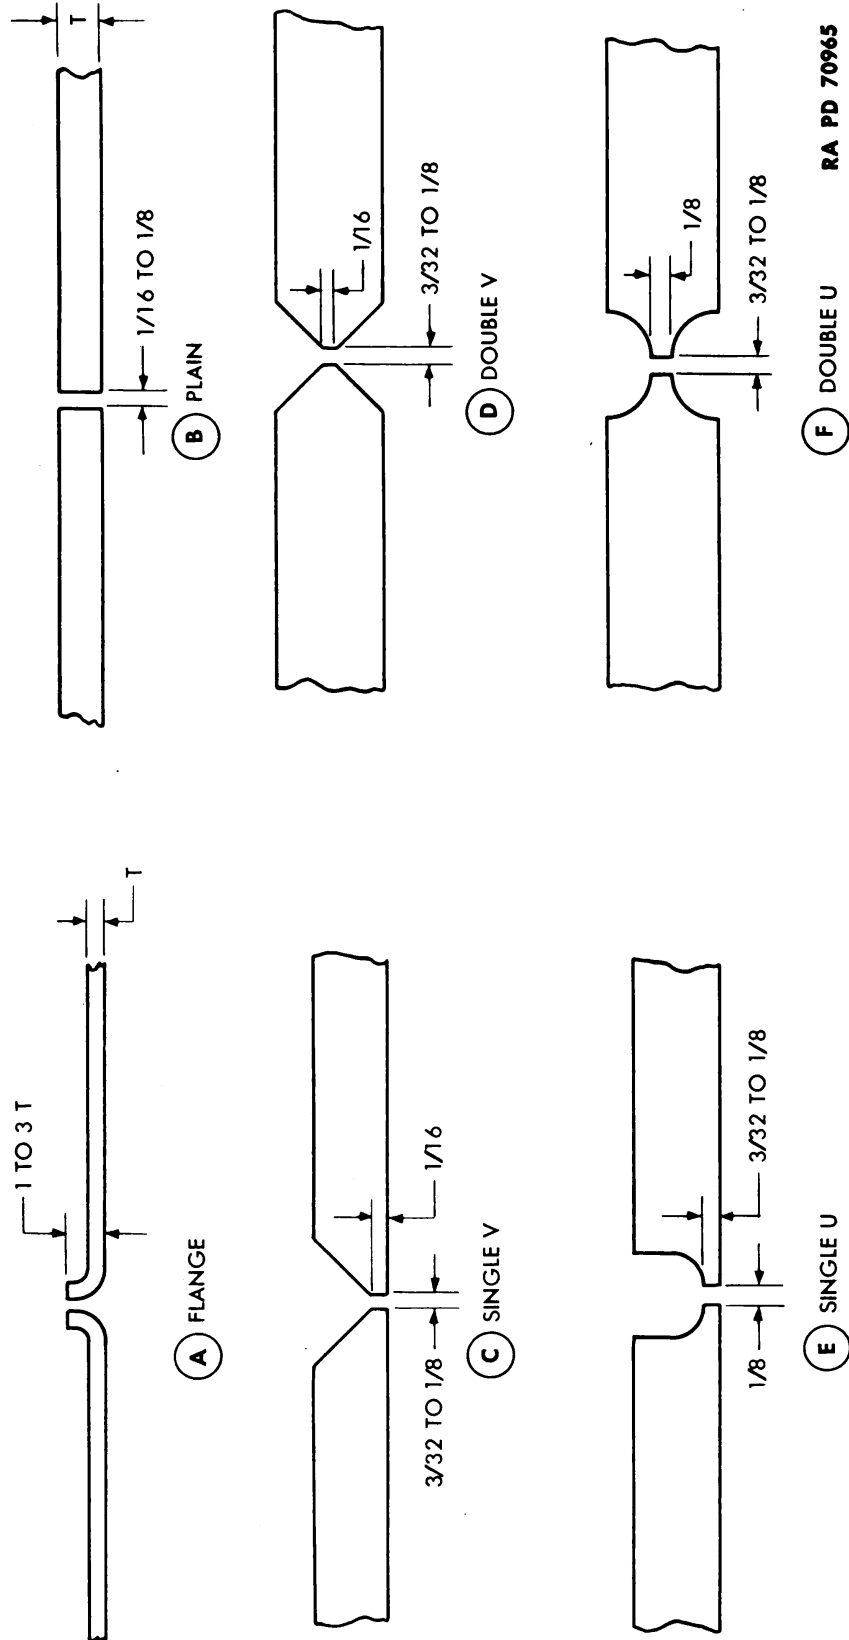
Types of Preparation of Metal for Welding Butt Joints
